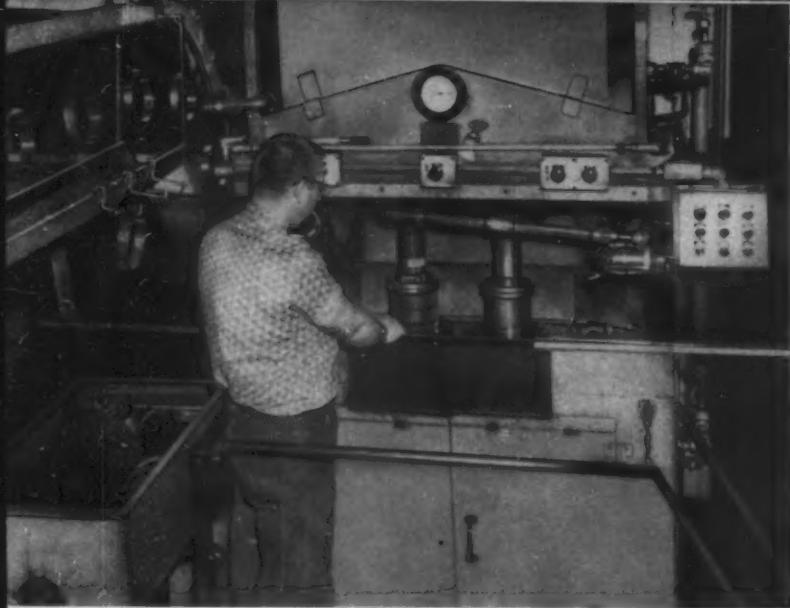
One ring gear is roughed and another is finished simultaneously on this dual-ram pull-up broaching machine. The tools are 6 feet long and weigh about 800 pounds each.
